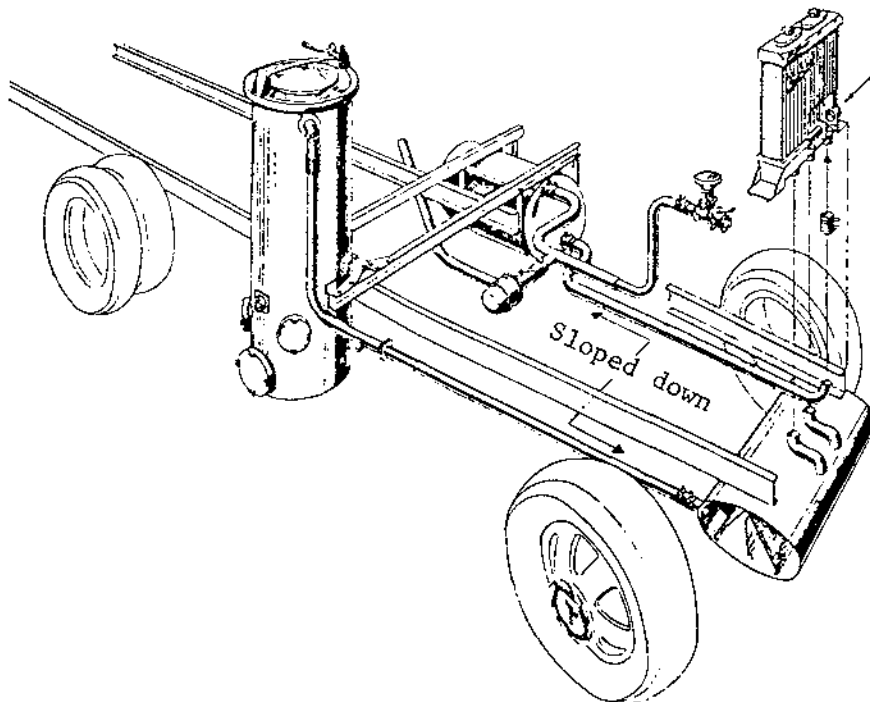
Installation of an Imbert Wood Gas Generator on a Truck.
